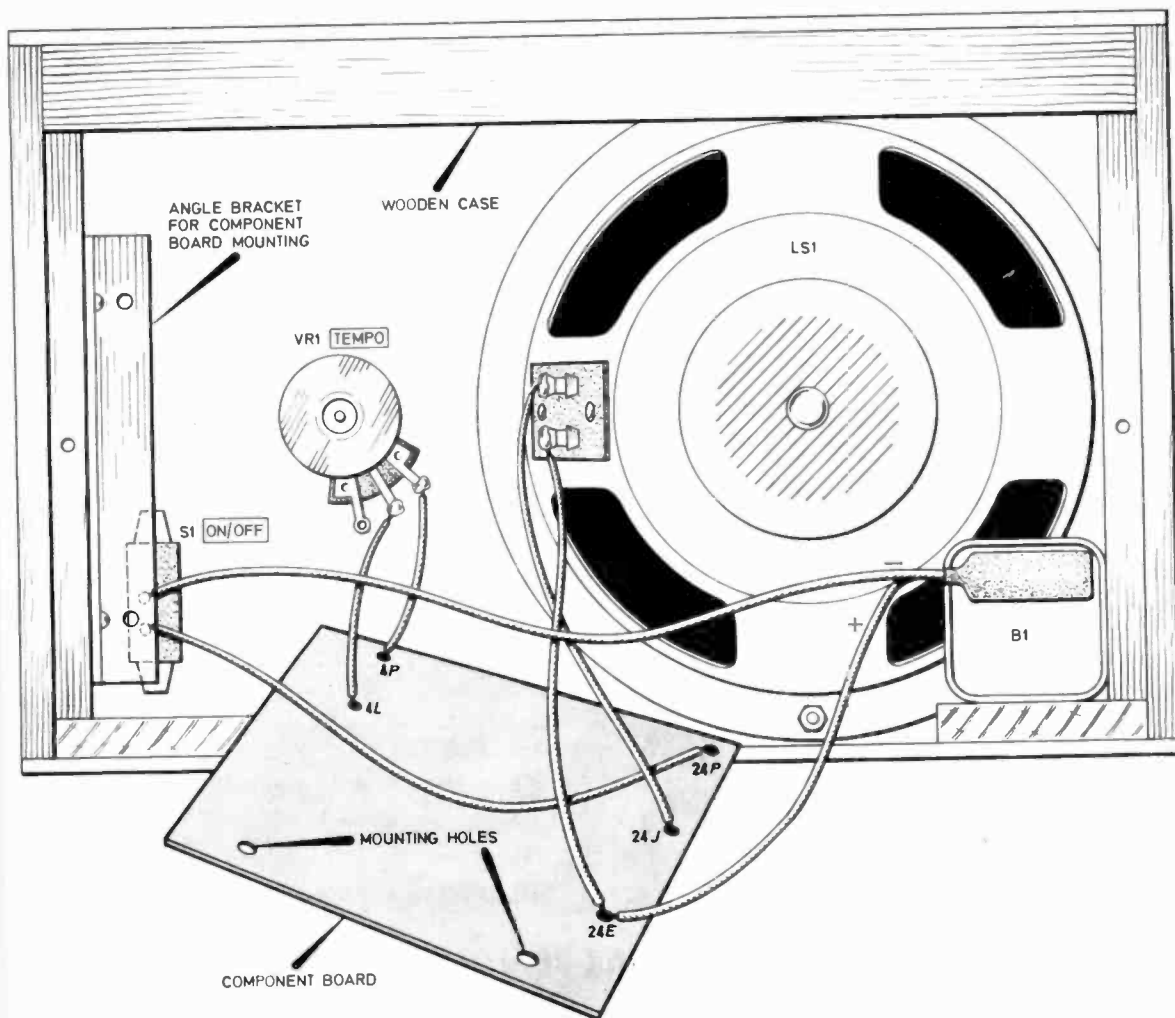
Layout and wiring of the complete Electronome. The circuit board is shown removed for clarity.
